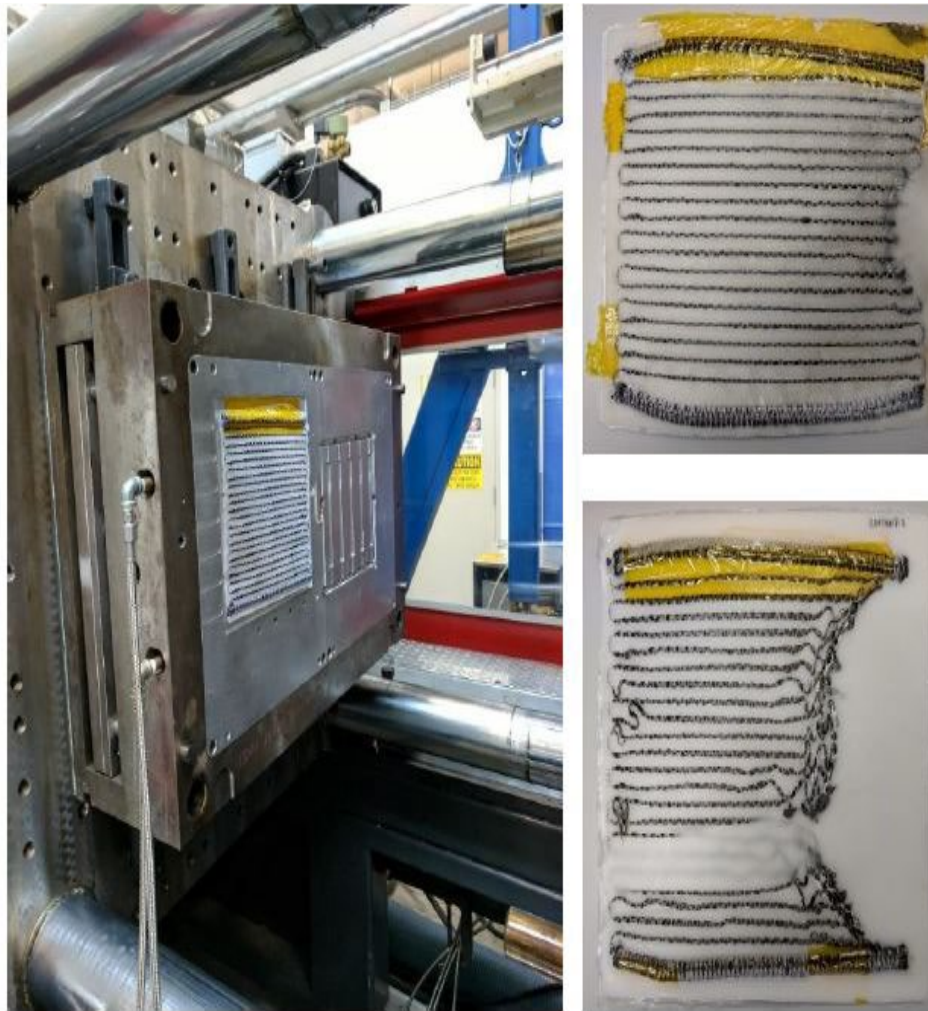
Preform Placed in Injection Mold (Left), Preform Shift / Fiber Wash Caused by Injection Molding (Right)
